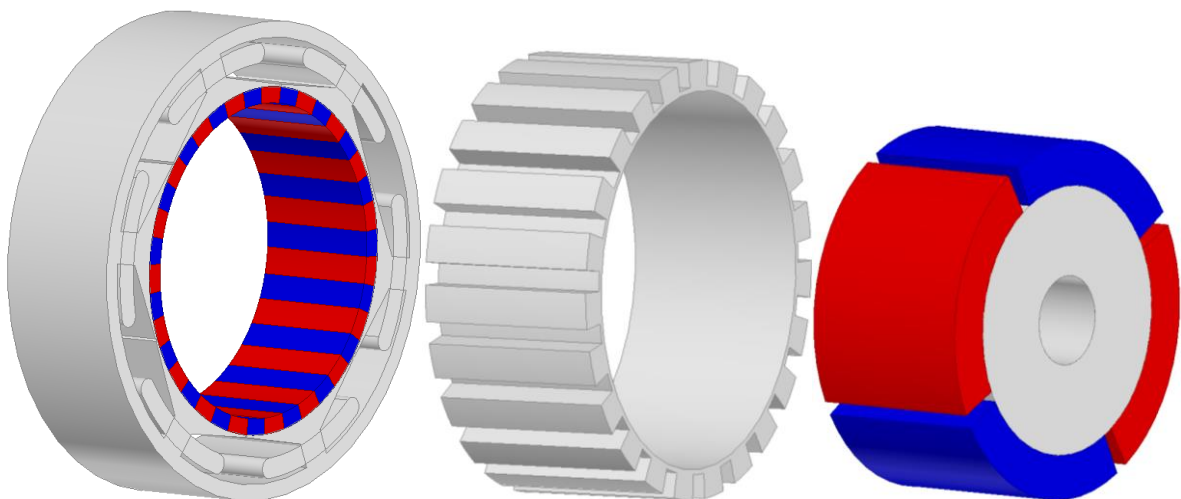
Outer stator magnetically-gear machine [TLA16].
